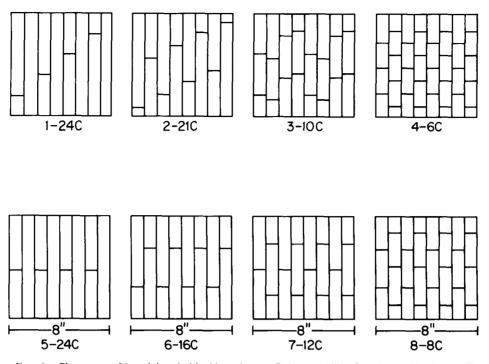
Placement of butt joints in blockboard core. Only one-third of each panel is shown. The pattern illustrated was repeated twice more in constructing a 24-in.  $\times$  24-in. panel. Not drawn to scale except on vertical axis where full 24-in. dimension is shown.
